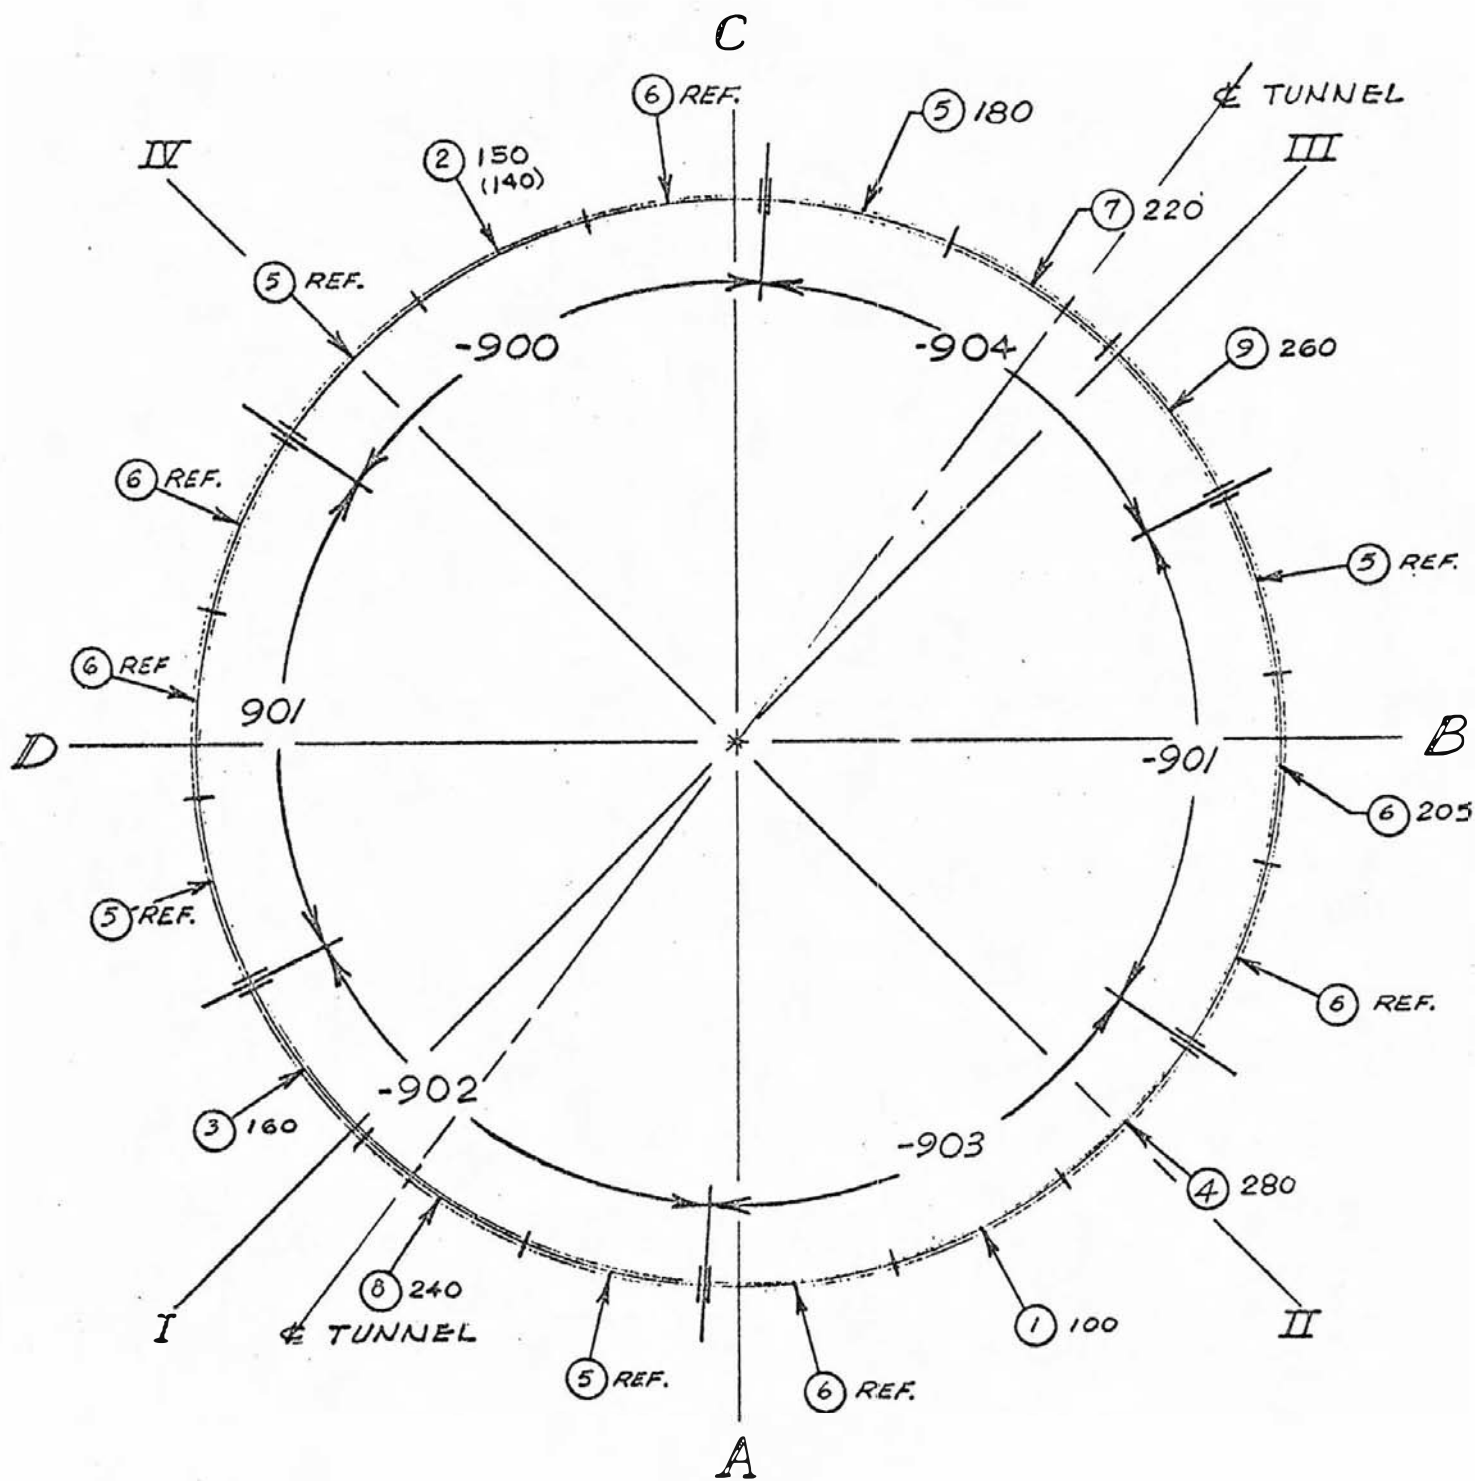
Intertank Structure Assembly Final Assembly Fixture AF-320-28000
